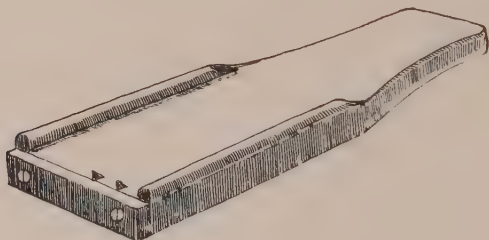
SKETCH OF HAND STRIPPER AND GAUGE
